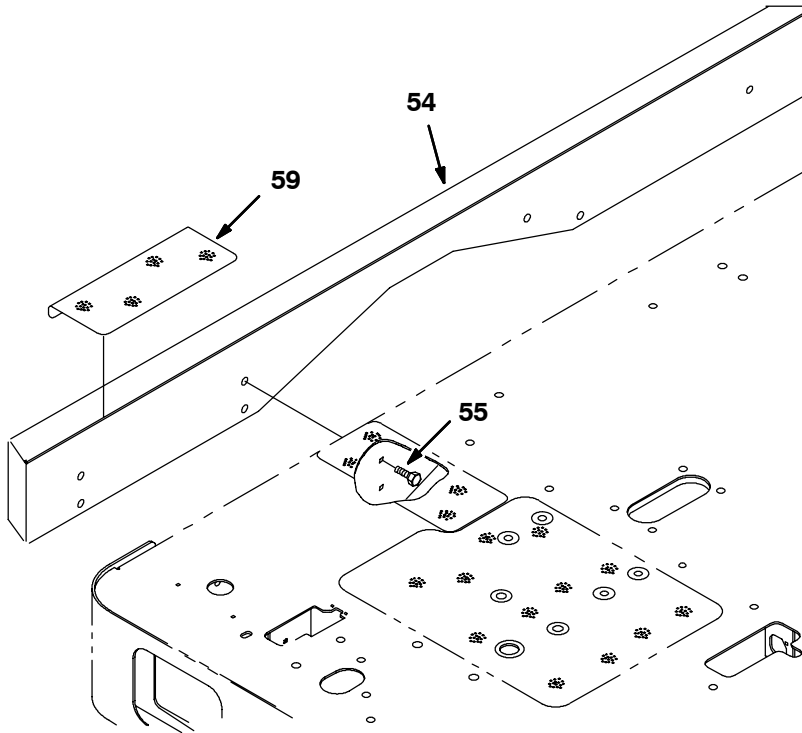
Rollout Battery Side Bumper Group 700mm (28in)
